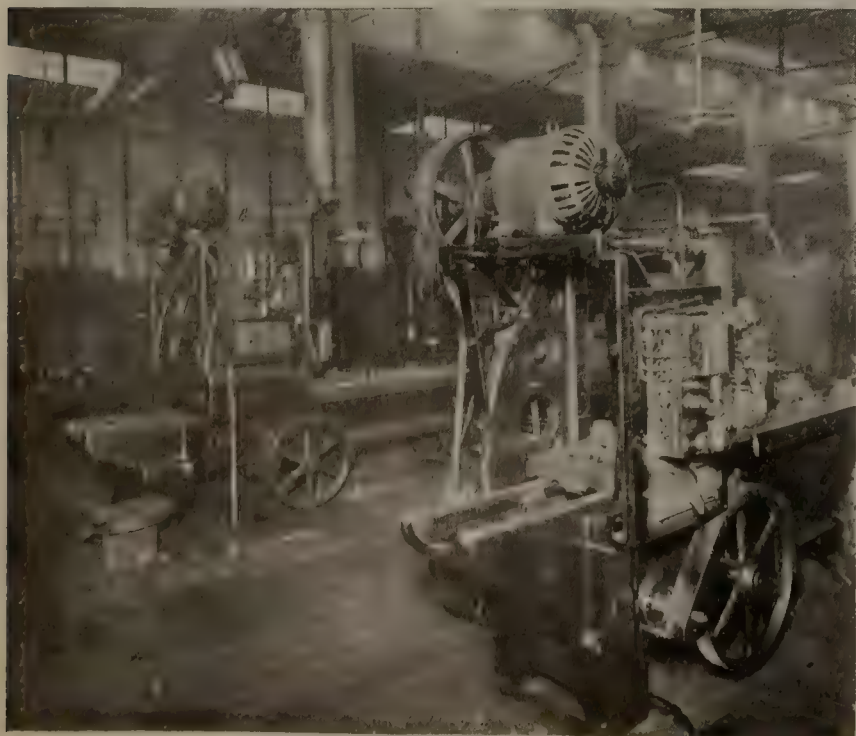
Two Planers Changed from Belt to Motor Drive.
